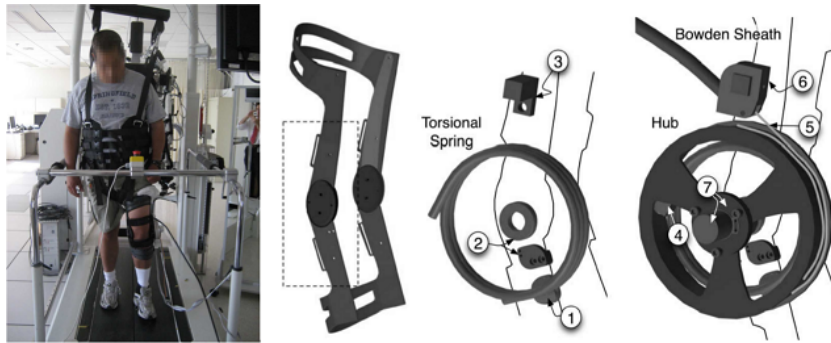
Backdrivable knee actuator for investigating gait in stroke consisting of a commercial brace, torsional spring, and a cable system. The free end of the cable is connected to a motor mounted to a bench and not on the person. The motor activates the system by pulling on the torsional spring [37].
